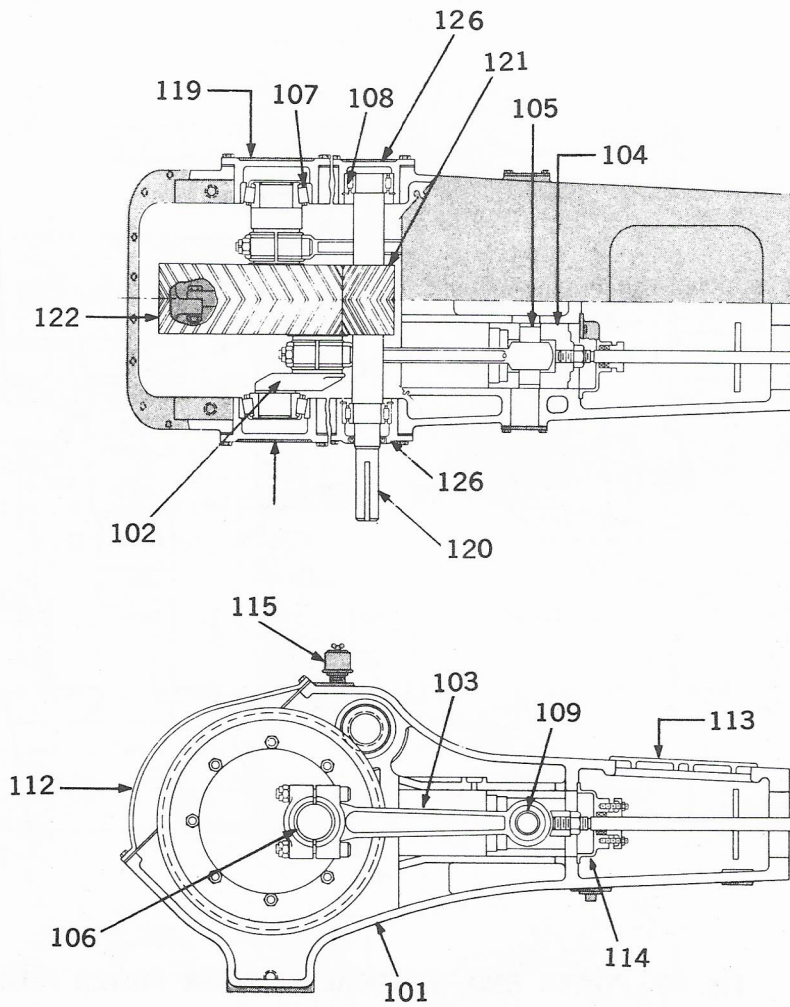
POWER END, HORIZONTAL DUPLEX POWER PUMP WITH INTEGRAL GEARS
